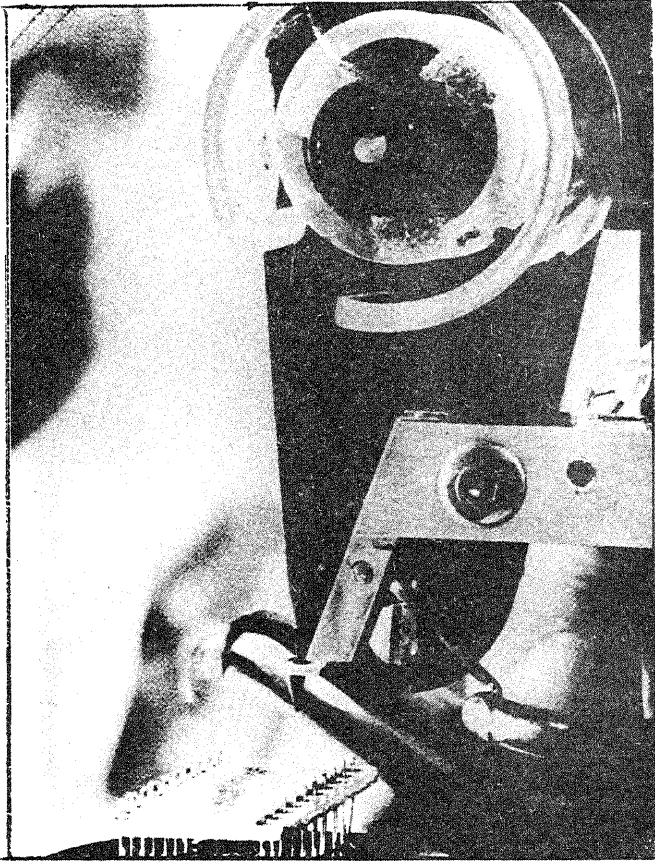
HUGHES' MICRO-PULSE BONDING MACHINE HEAD
